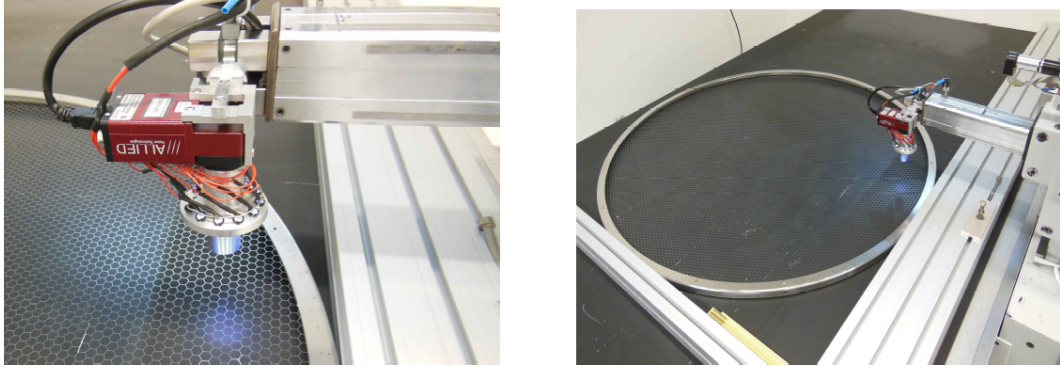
Mesh prototype during the welding on the proper electrode ring.
